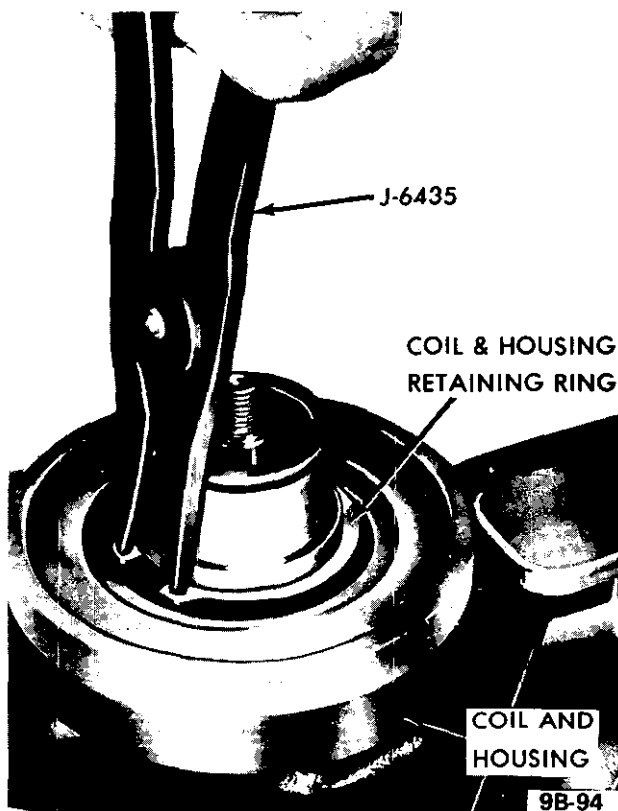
B-120 Removing or Installing Coil and Housing Retainer Ring
